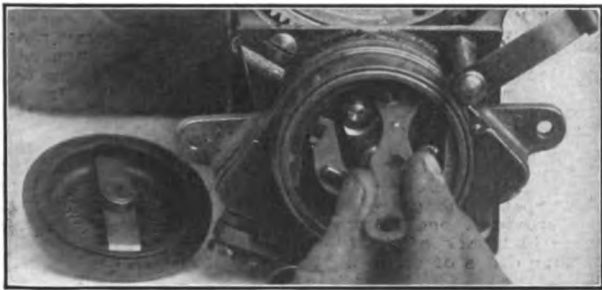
Loosening Locking Nut on Bosch D U 4 Magneto.
